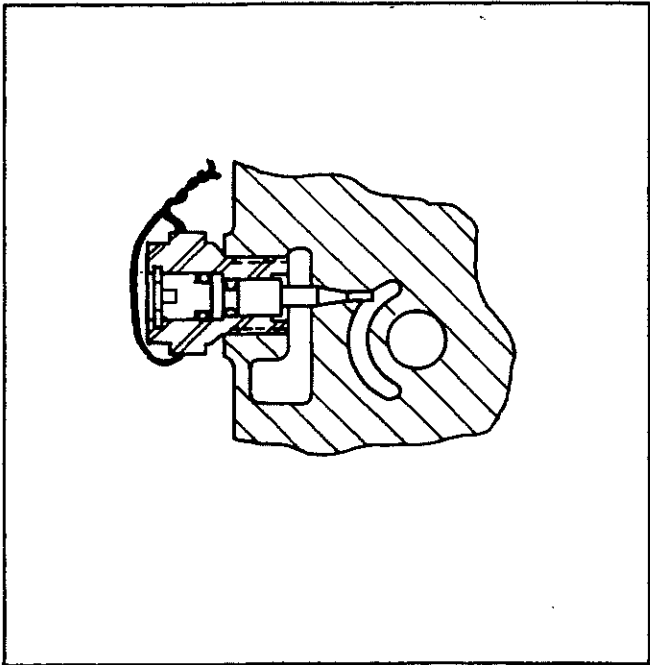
B. ADJUSTING NEEDLE INSTALLED
